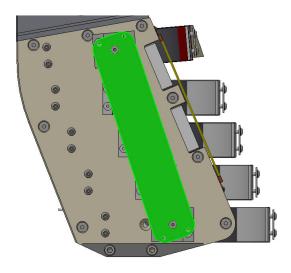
Controller mounting plate (in green) bolted to the controller feet
